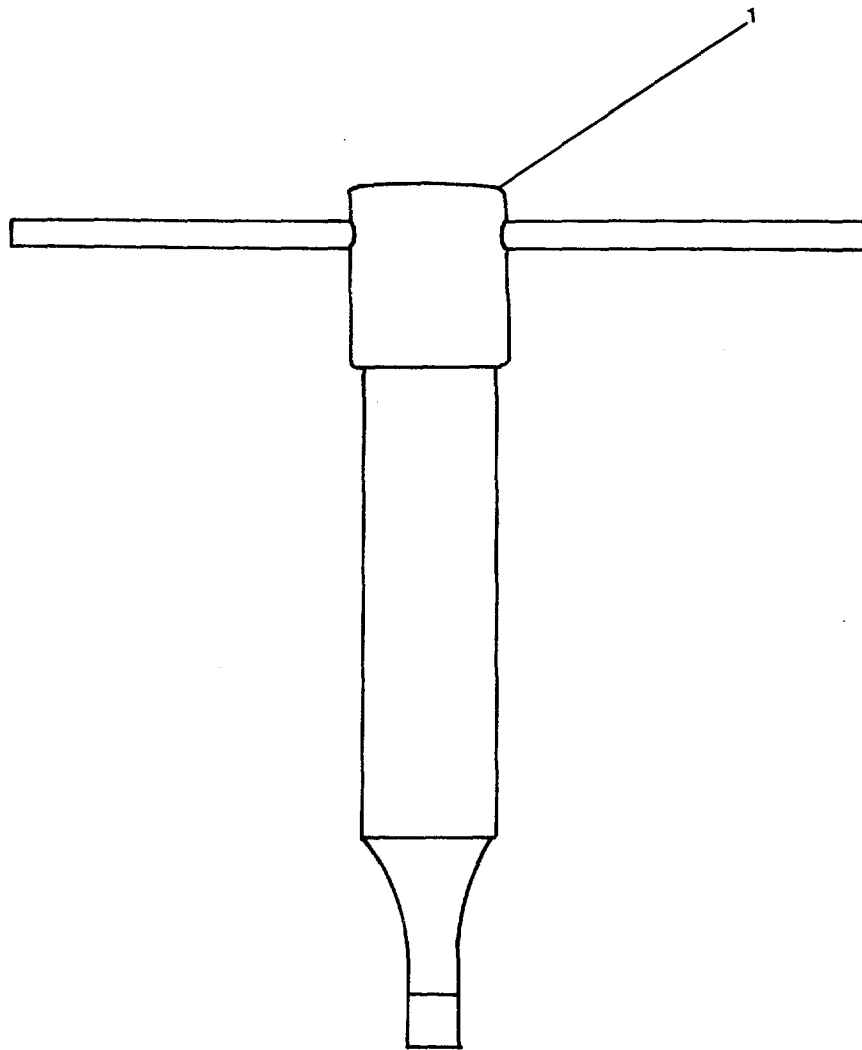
B WRENCH 10-0362-00 (SHEET 1 OF 2)
